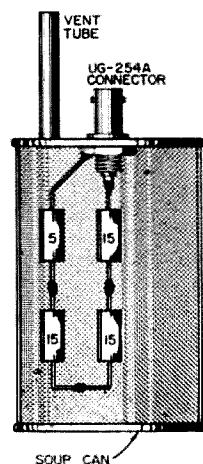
Construction of the Minican. Main parts are a soup can, coax connector and resistors.
